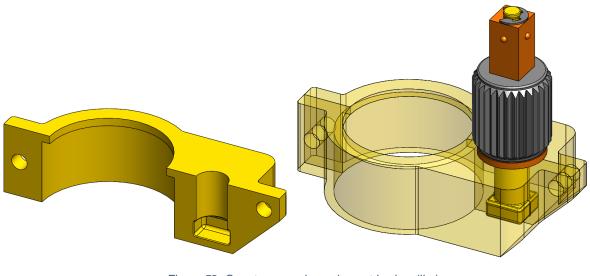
Counter gear clamp, isometric view (Ihs) Figure 53: Counter gear system, isometric view (rhs)
